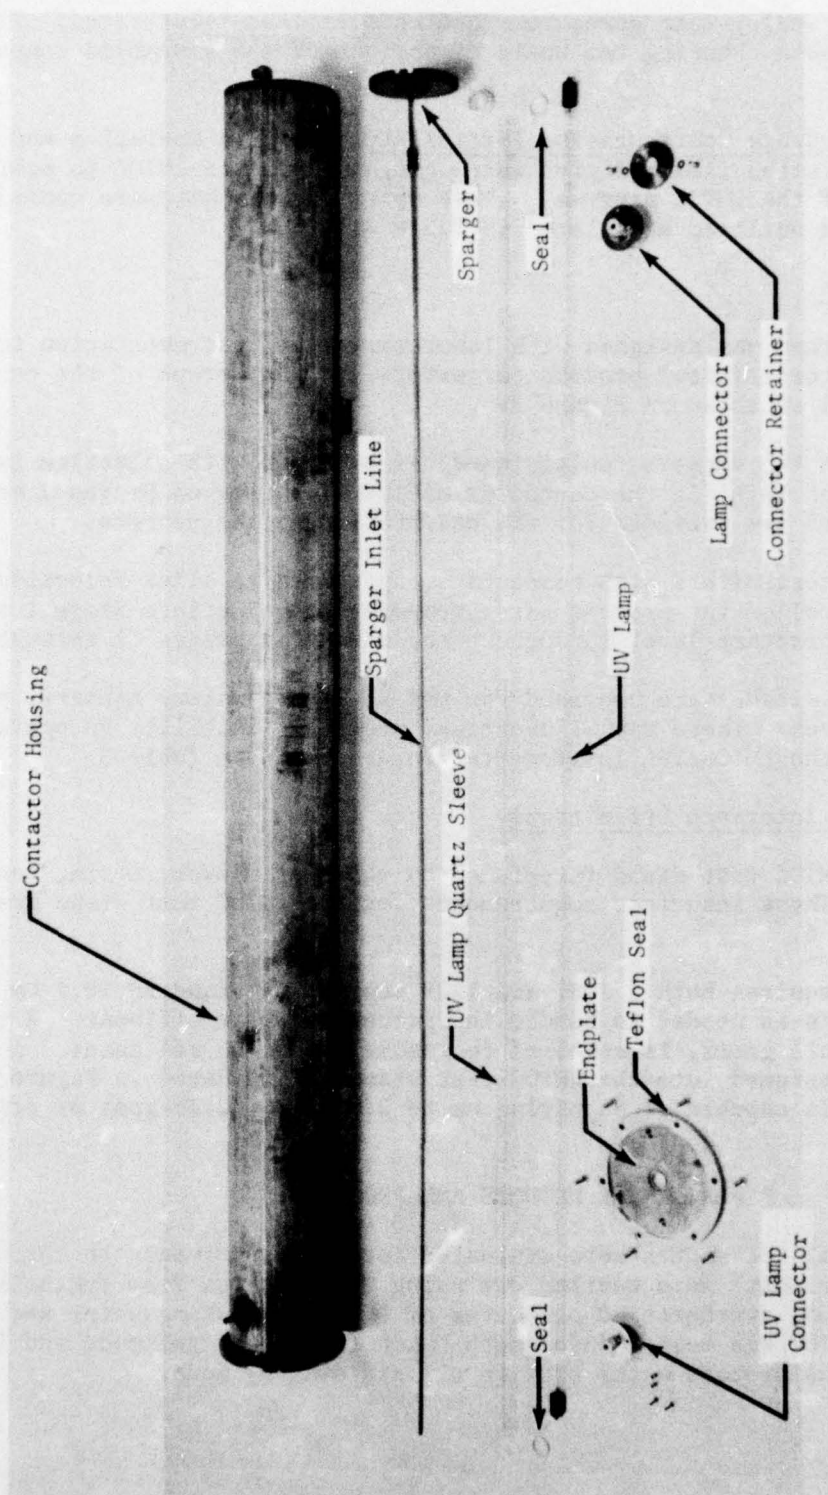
DISASSEMBLED LMTOC COLUMN
